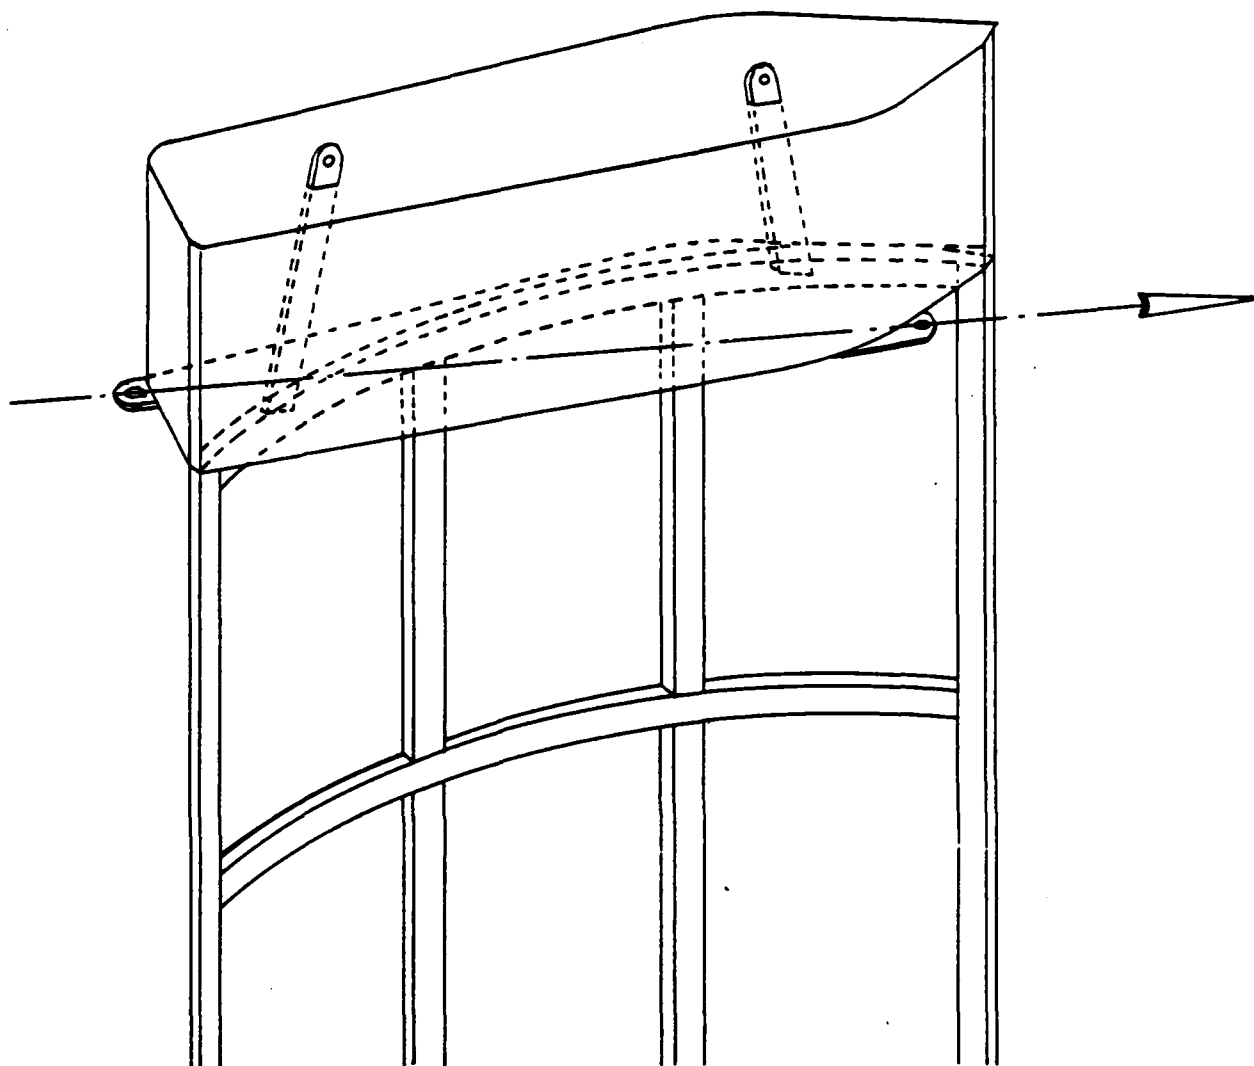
CONSTRUCTION DETAILS FOR TOP AND BOTTOM PLATES OF THE FULL SCALE BOARDS.
